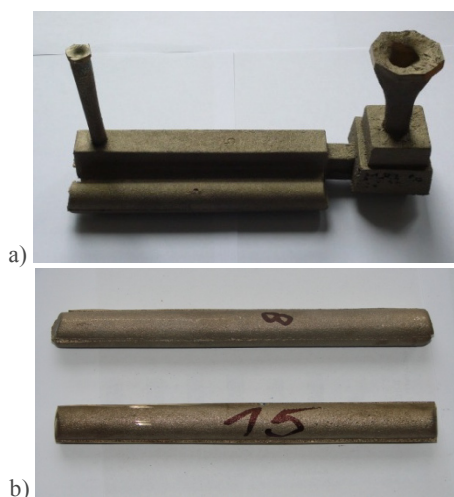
Specimens for mechanical testing and structure examinations: a) casting, b) specimens machined for studies of heat treatment
